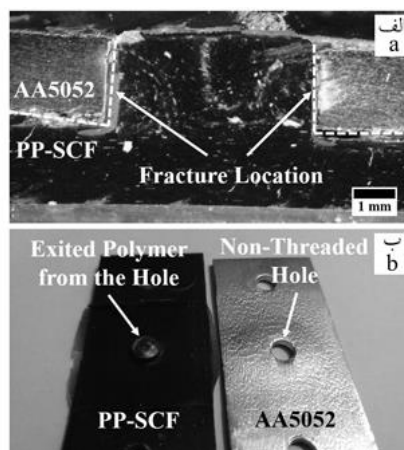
Effect of thread inside the hole on fracture location of joint in cross-tension test: a) cross-section of joint with non-threaded hole and b) re-solidified polymer drawn out from the non-threaded hole
